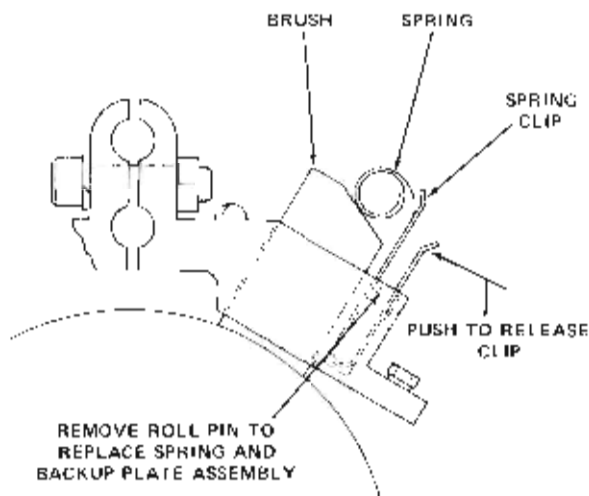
Constant Pressure Brush Assembly, AC Motors
